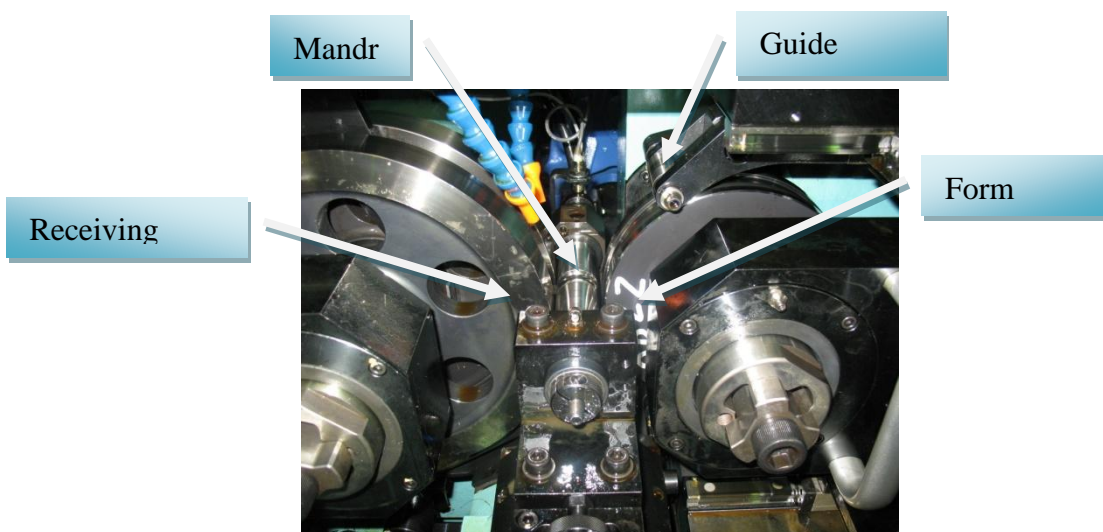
KYOEI NCRF-120 OR Ring Rolling Machine Forming Tools
